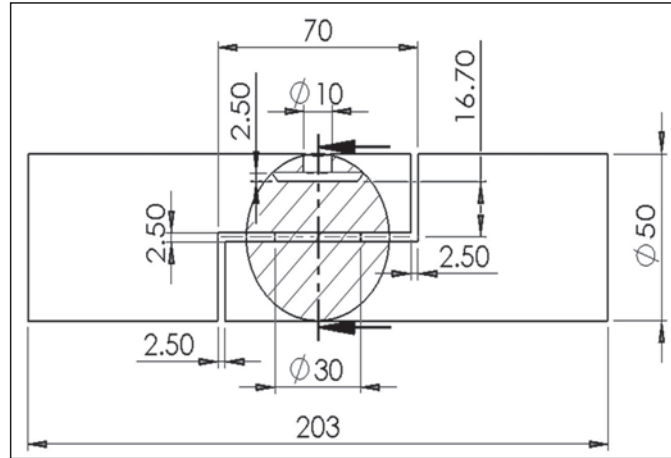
Cross section of simplified geometry of the globe valve (Dimensions are in mm.)
